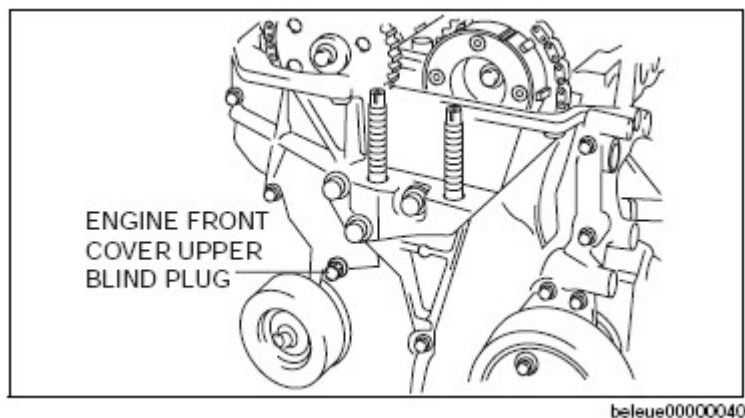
Identifying Engine Front Cover Upper Blind Plug
